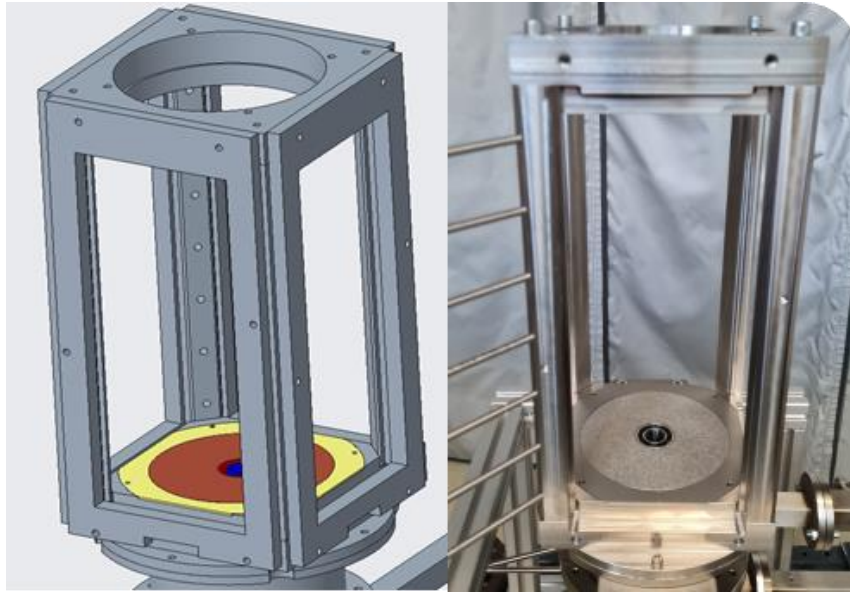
Design of the combustion chamber (left: CAD, right: photo).
